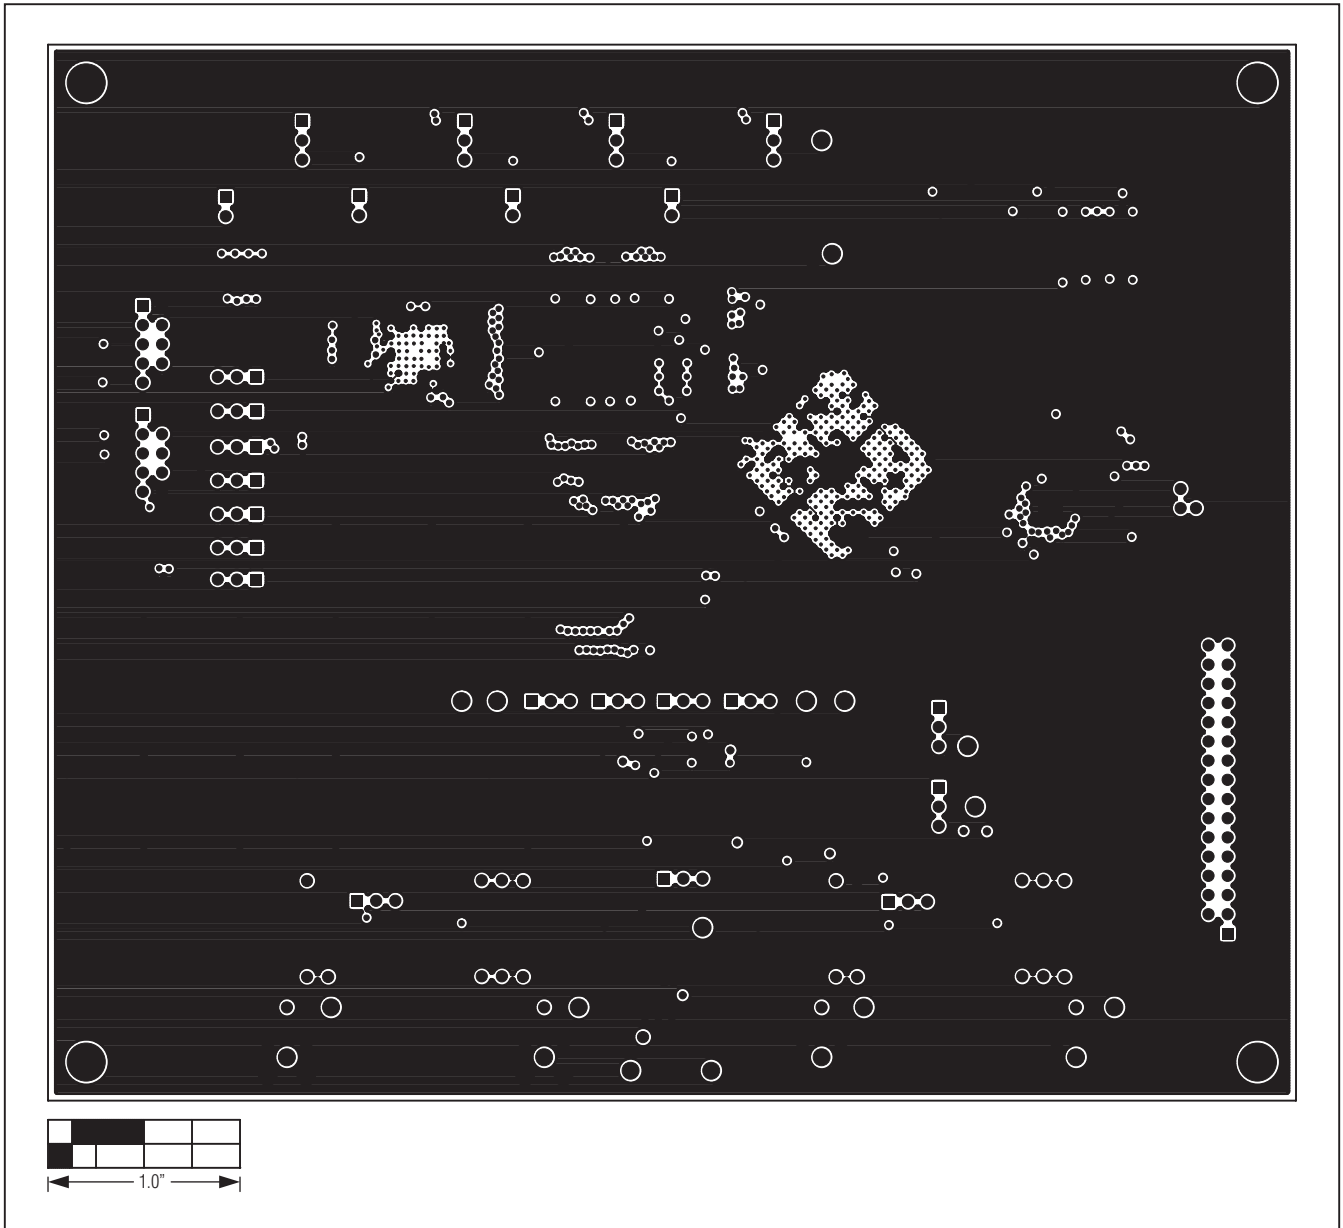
MAX11666 EV Kit PCB Layout—Layer 8
